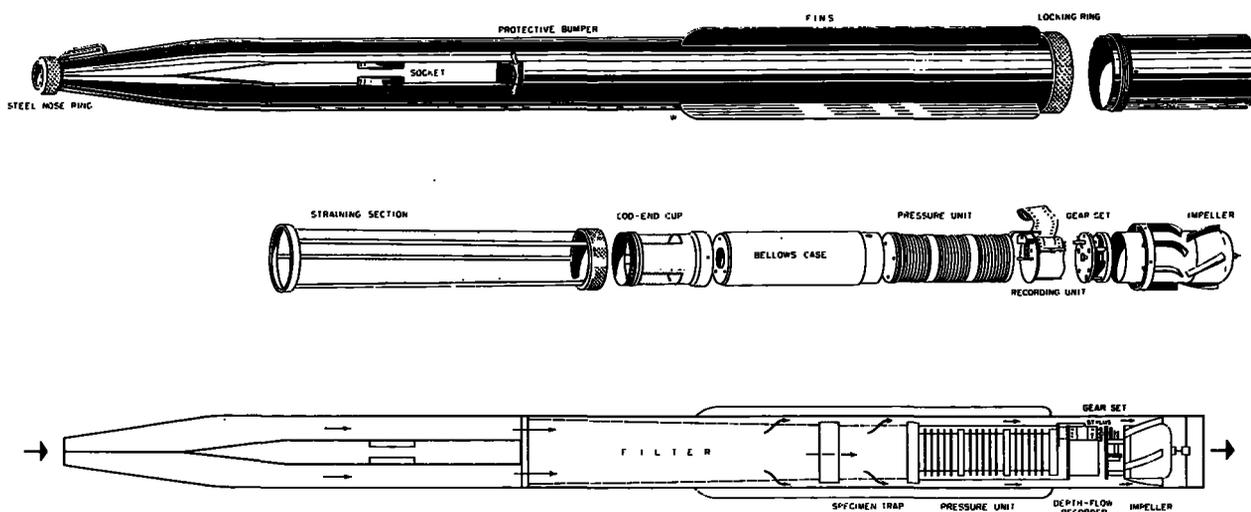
Exploded schematic drawing of high-speed plankton sampler.
